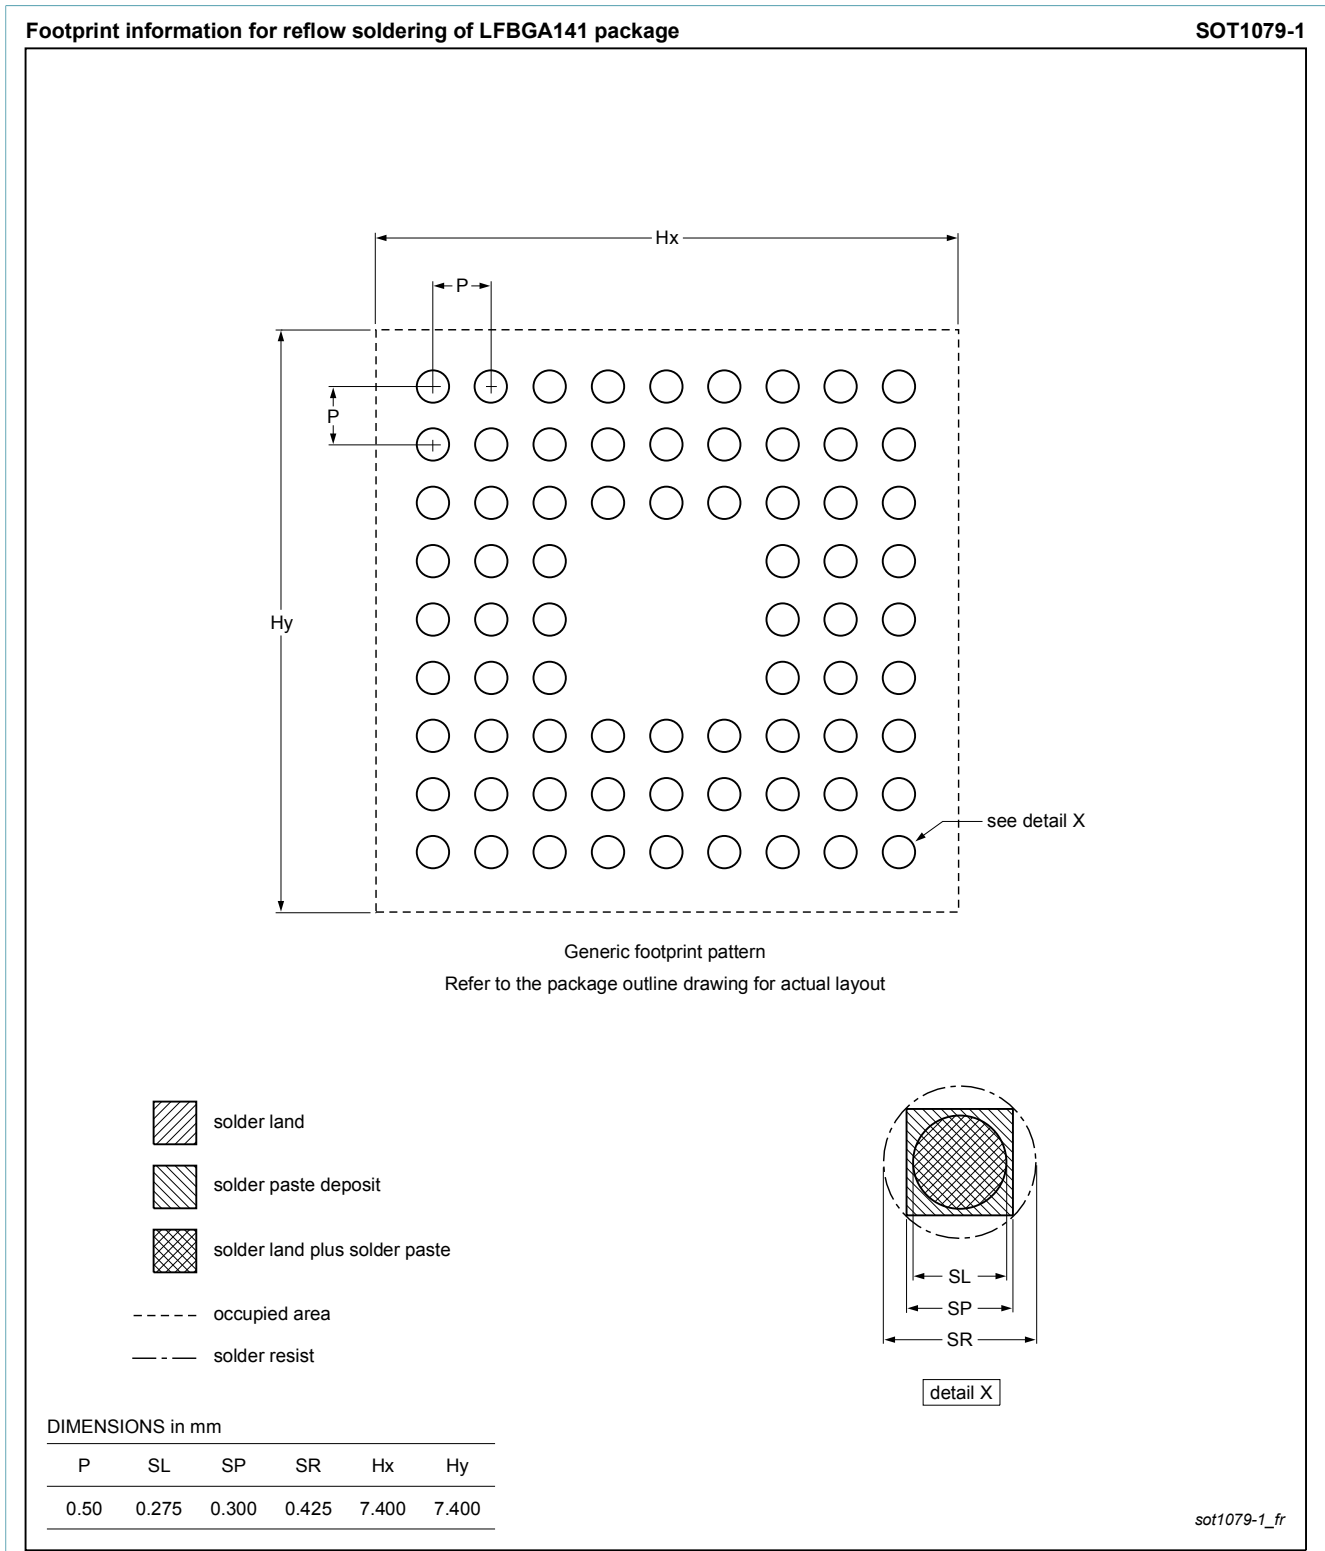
Reflow soldering footprint for LFBGA141 (SOT1079-1)
